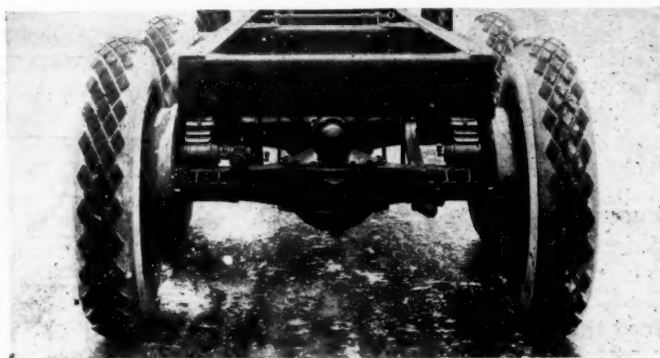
Tandem axle construction of Goodyear six-wheeled truck
